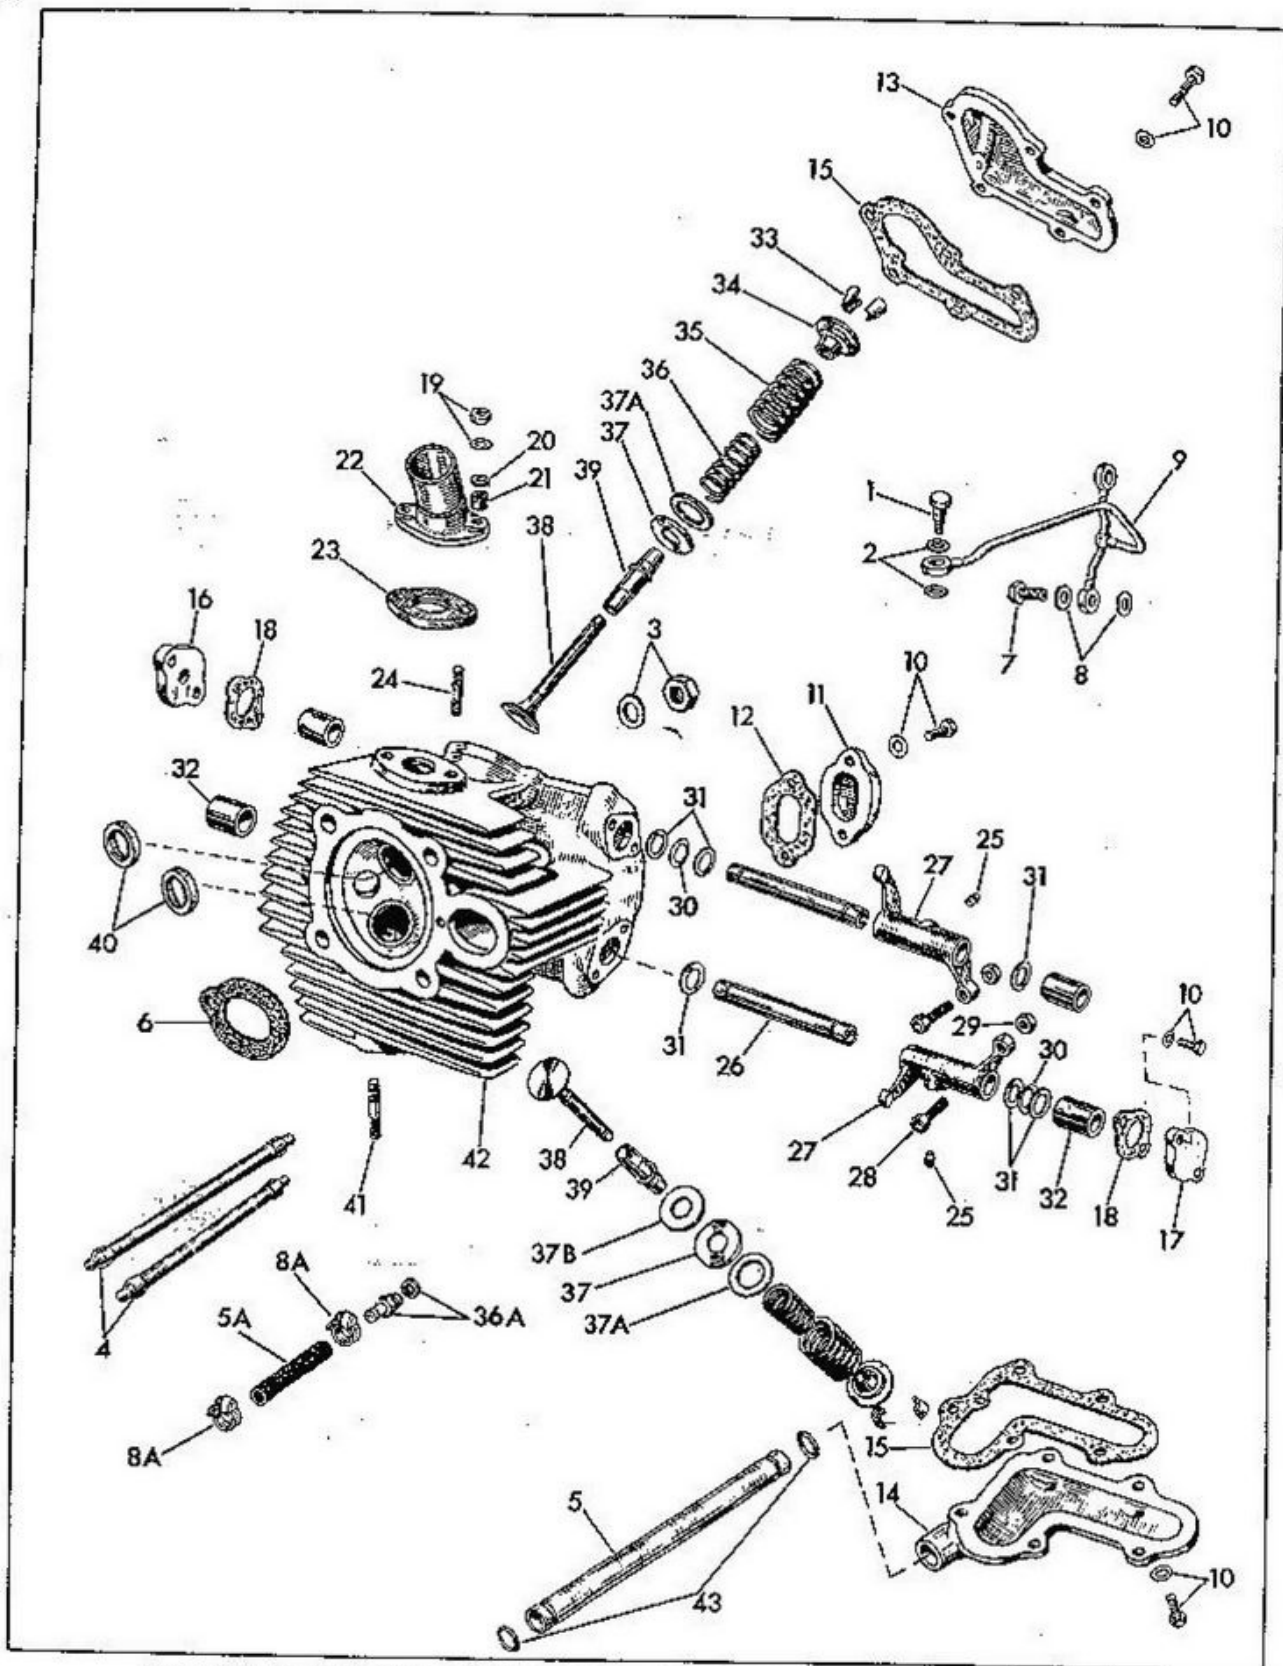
B-12. 1961-1966 and 1973 and Later Cylinder Head Assembly - Exploded View
